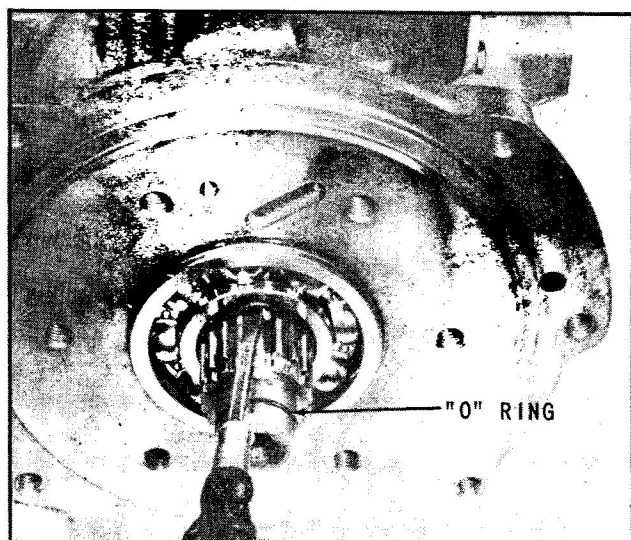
Assemble "O" Ring (Retainer removed to show "O" rings)
